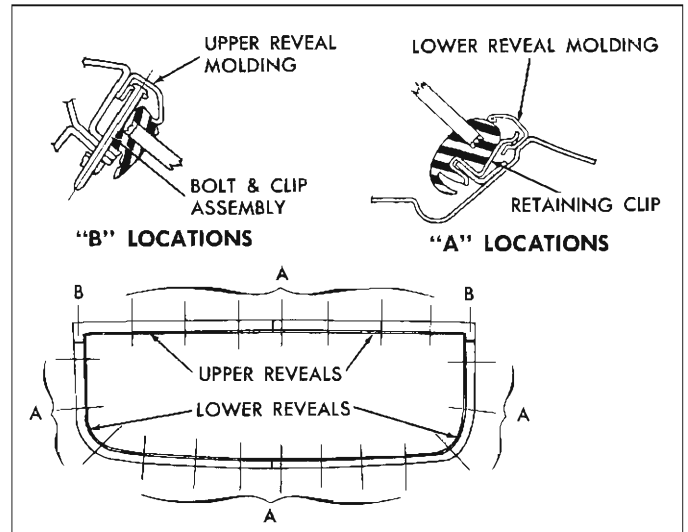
Back Window Reveal Moldings—all "11" and "69" Styles
